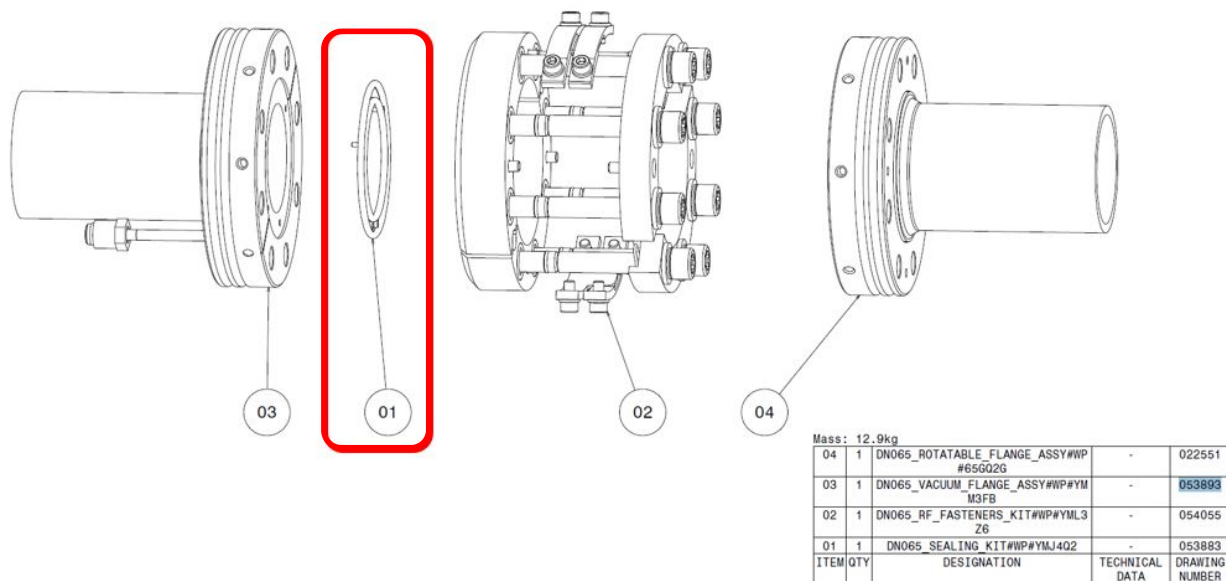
Metallic Sealing Kit shown in an typical flange assy (DN65)
